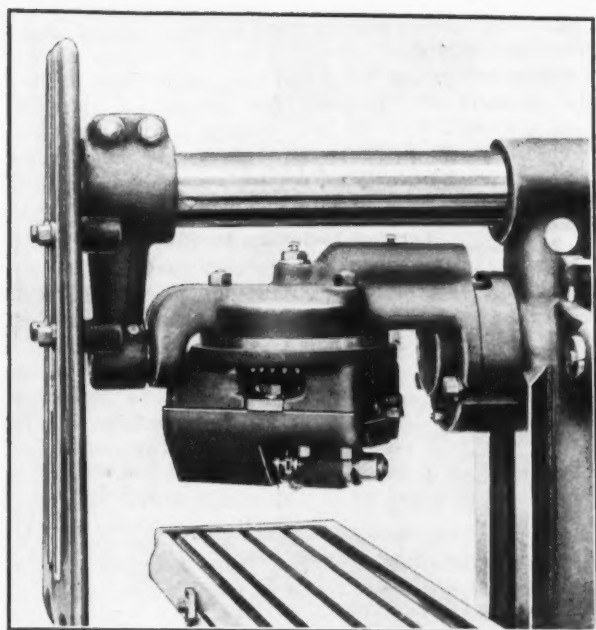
The Le Blond Universal Spiral Gear Cutting Attachment.
